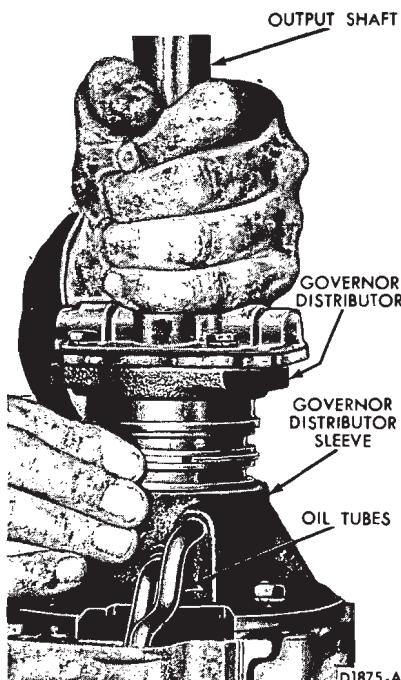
Removing or Installing Output Shaft and Governor Distributor—C4 Automatic
